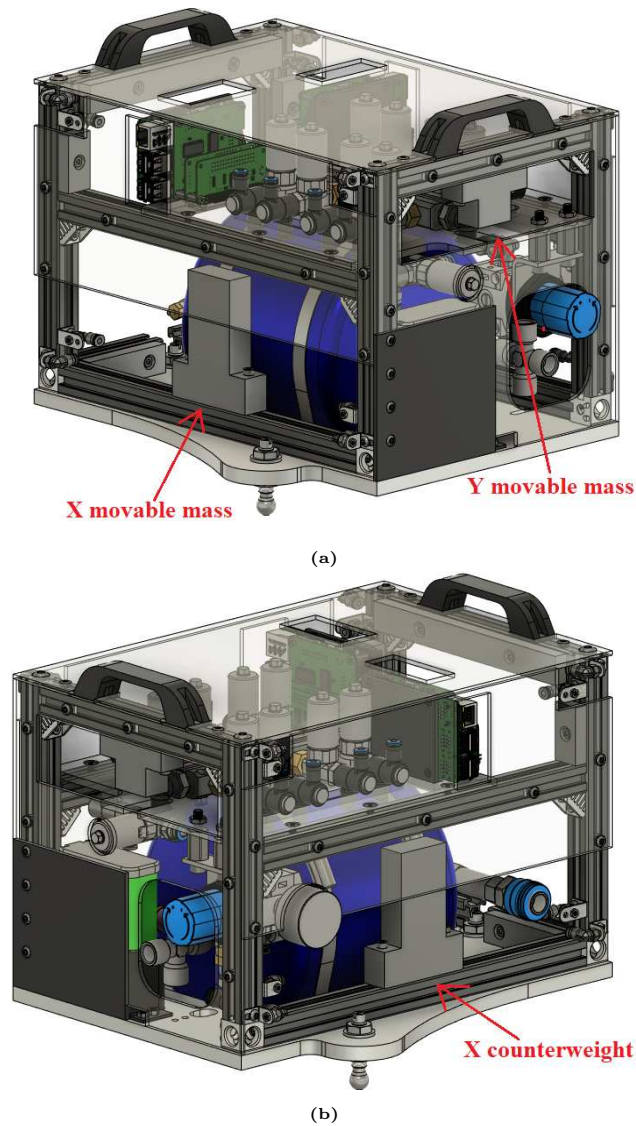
Movable steel blocks: (a) view 1 on movable masses and (b) view 2 on the counterweight.
